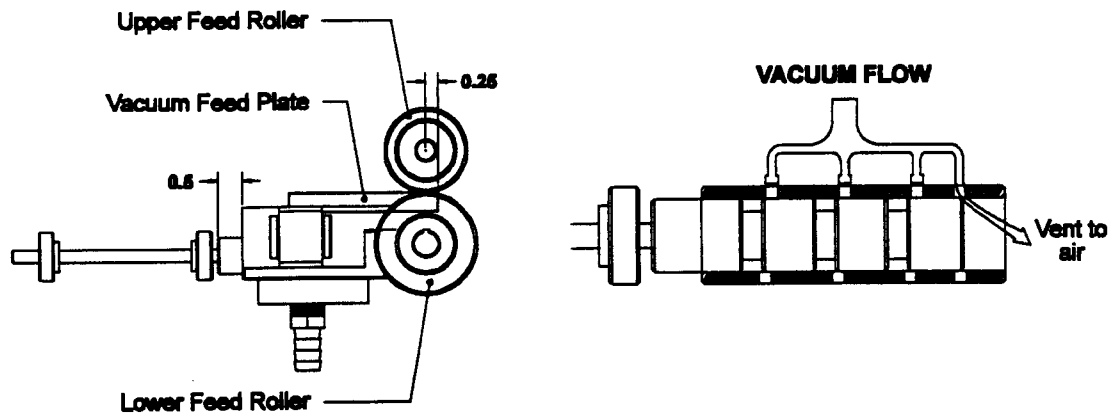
Feeder vacuum valve assembly illustrating the location of the spool assembly when the shuttle feed plate is 1/4" past the center of the feed rollers. Side view shows vacuum flow from the top to the exhaust port when vacuum is released. End port shown is the vent port which is fully open.
